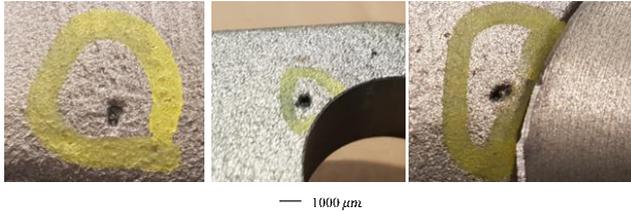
Examples for surface defects on nodular cast iron components.
